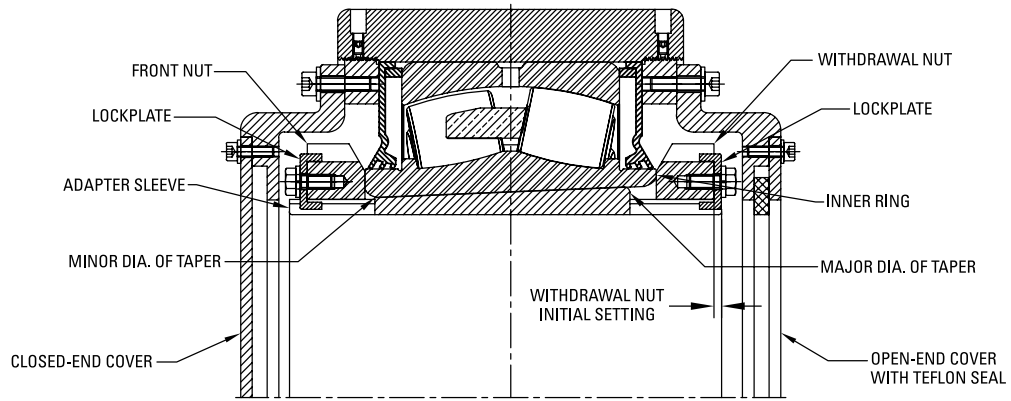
Cross-sectional view of bearing sizes 23144K and larger
